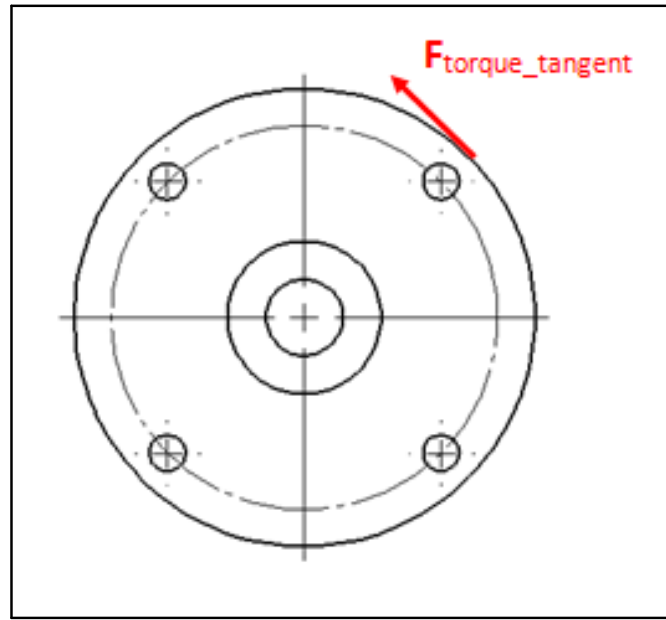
Side View of Rear Sprocket Half Spool including Force due to Torque
